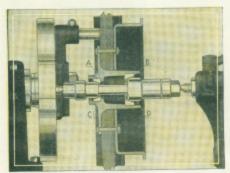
Truing an External Brake Drum. A Self-Centering Mandrel with Universal Bearing Adapters is Used to Mount Wheel Between Centers in the Lathe.
